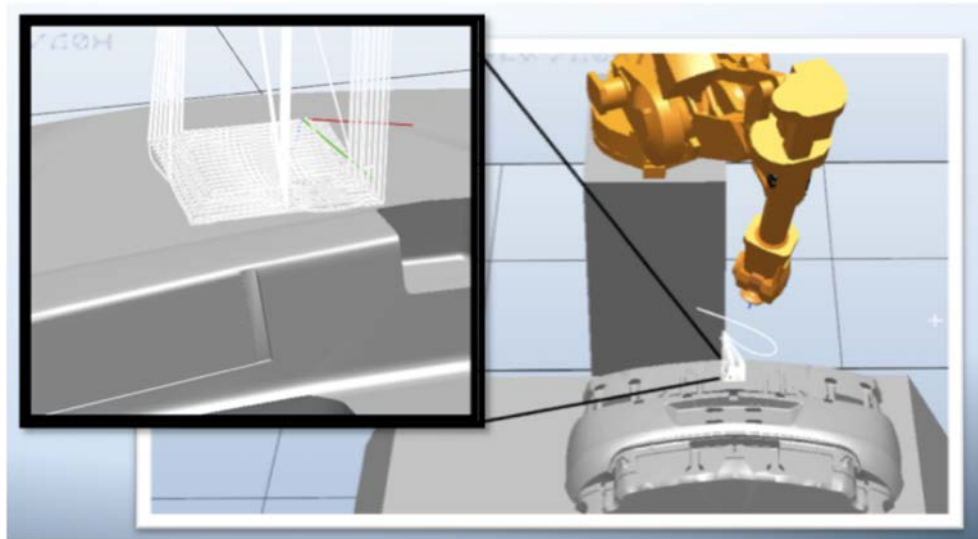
An example of a path generation using CNC software substituting cutter diameter by weld pool width for one layer of a three dimensional shape
